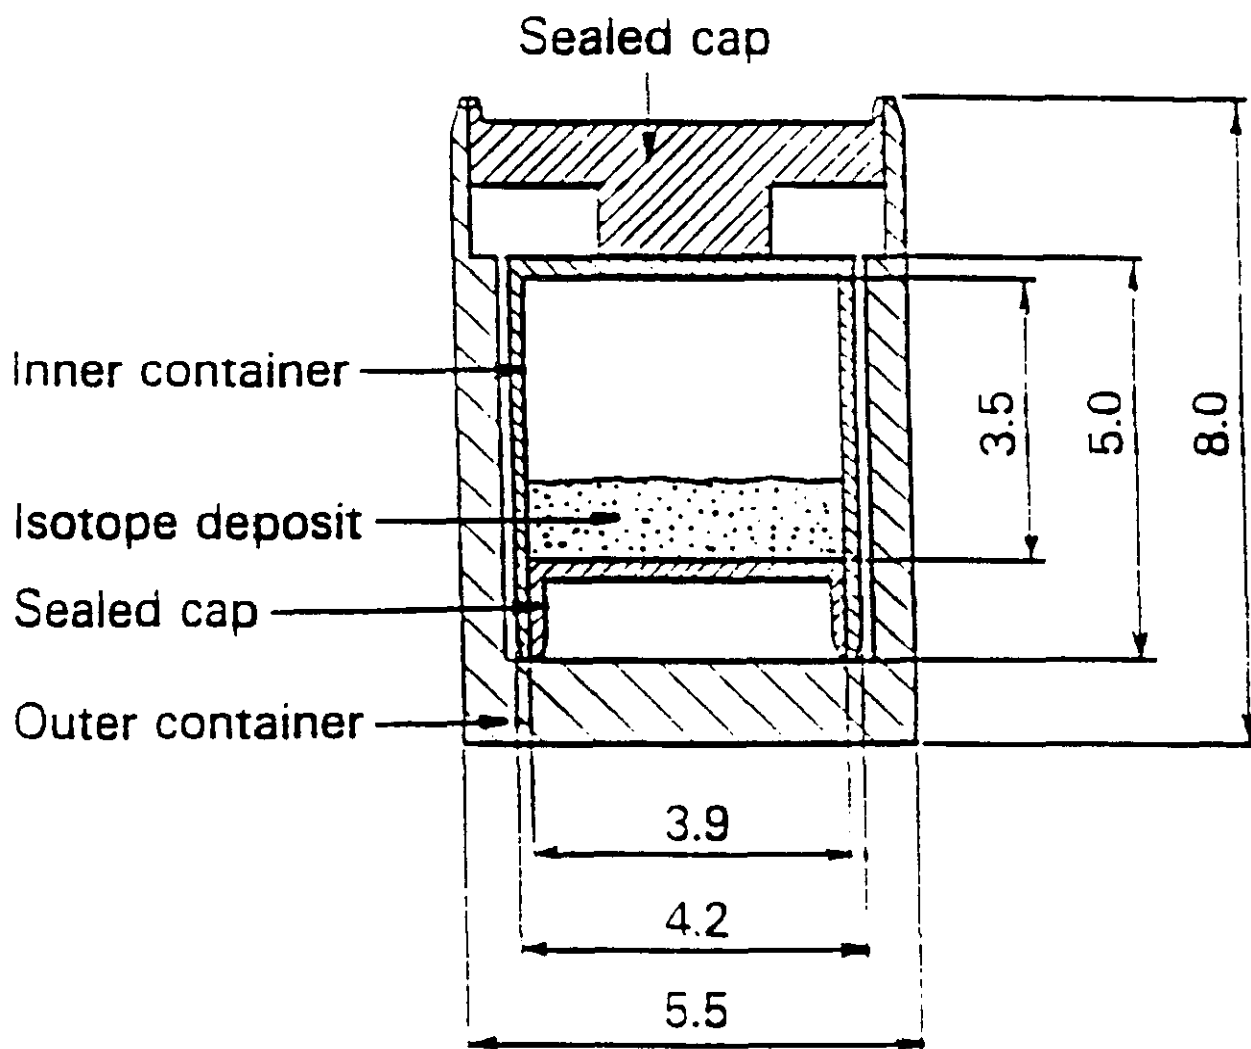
Stainless steel double container for PROFIL irradiation. Dimensions are given in millimetres.
